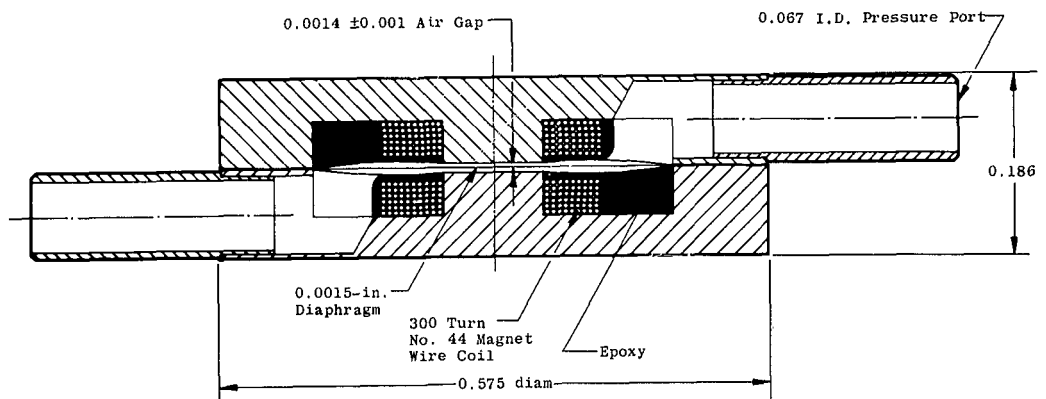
Assembly Section of the Low Pressure Wafer Gage
